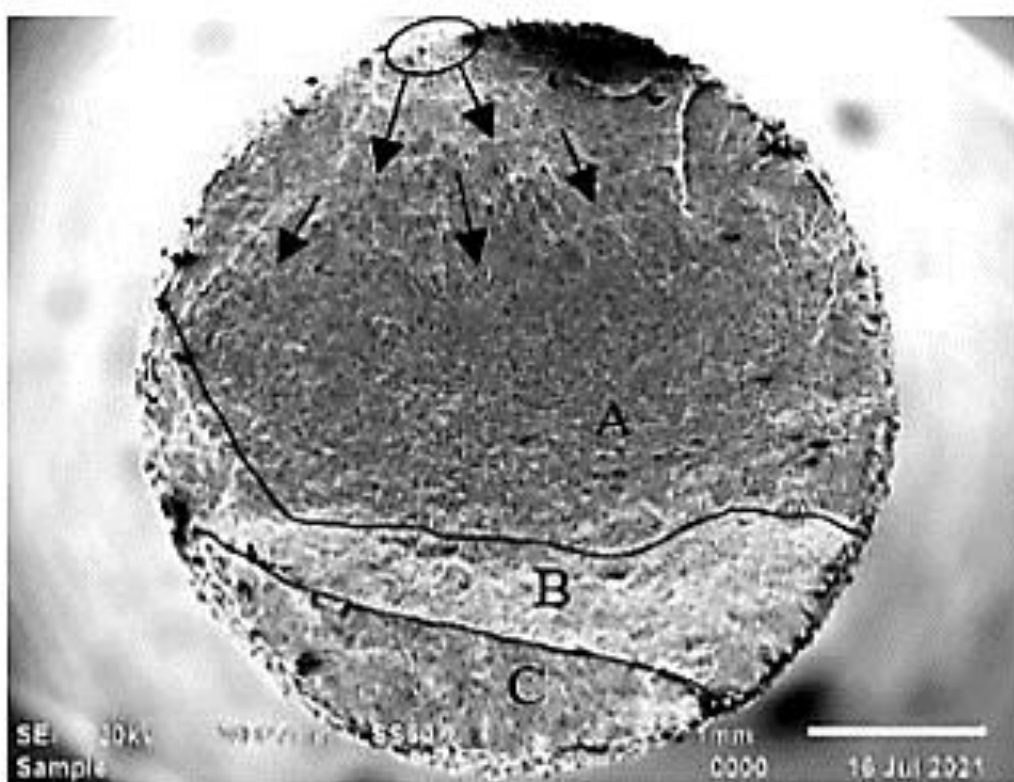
Overview of the fracture surface of the fatigue Z4 specimen. A, B and C represent stable crack propagation zone, propagation and final fracture, respectively
